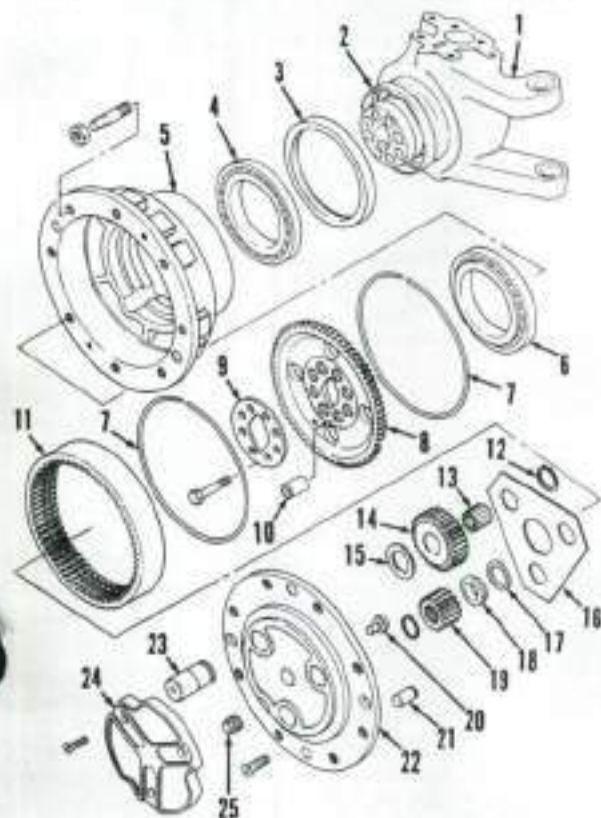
Exploded view of final drive assembly used on Type 709/19 Carraro front drive axle.
